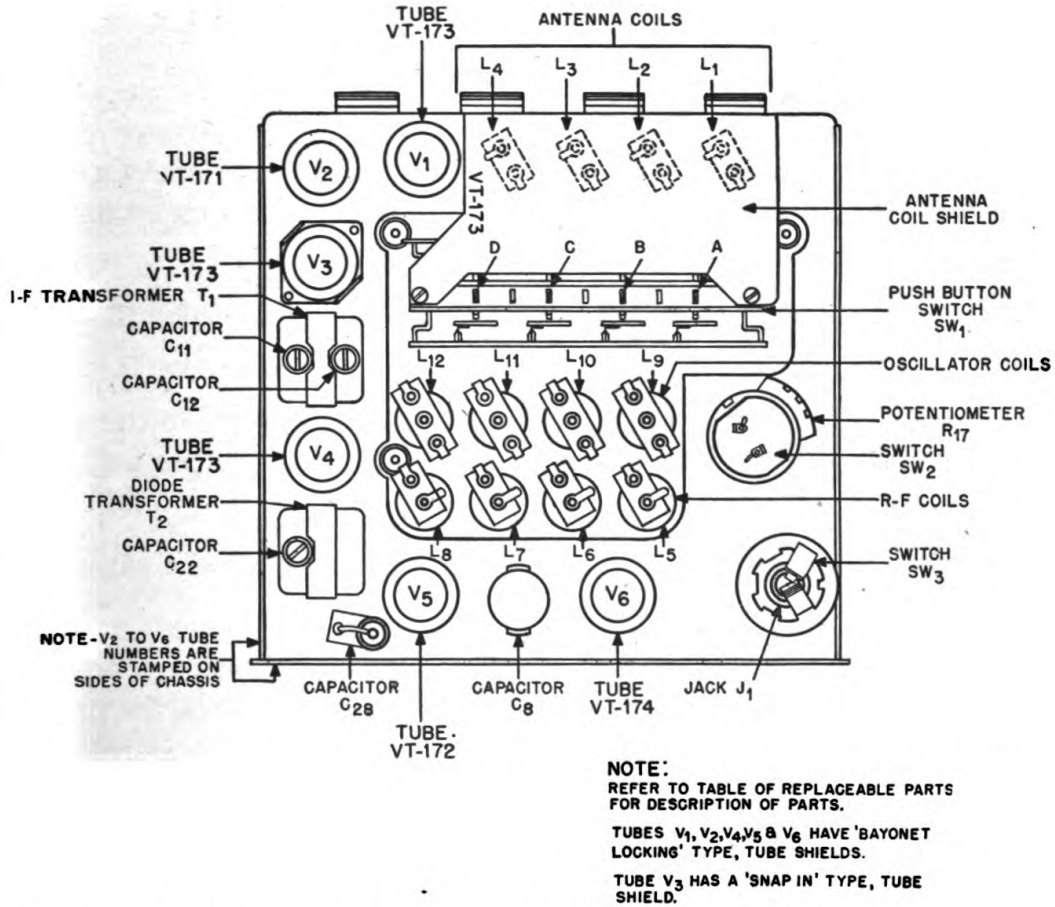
RADIO RECEIVER BC-728-A, CHASSIS—TOP VIEW—SHOWING MAJOR PARTS
